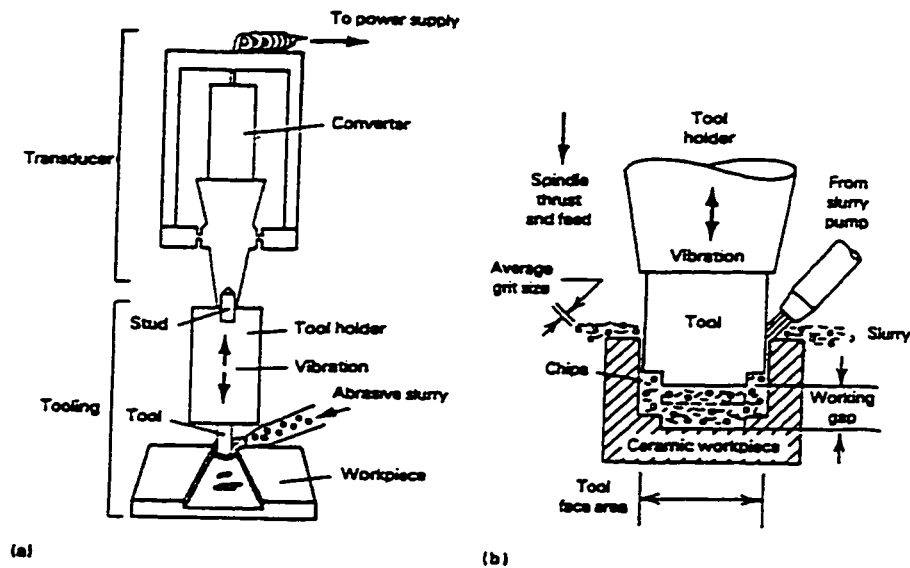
Schematic of an Ultrasonic Machine<sup>146</sup>
